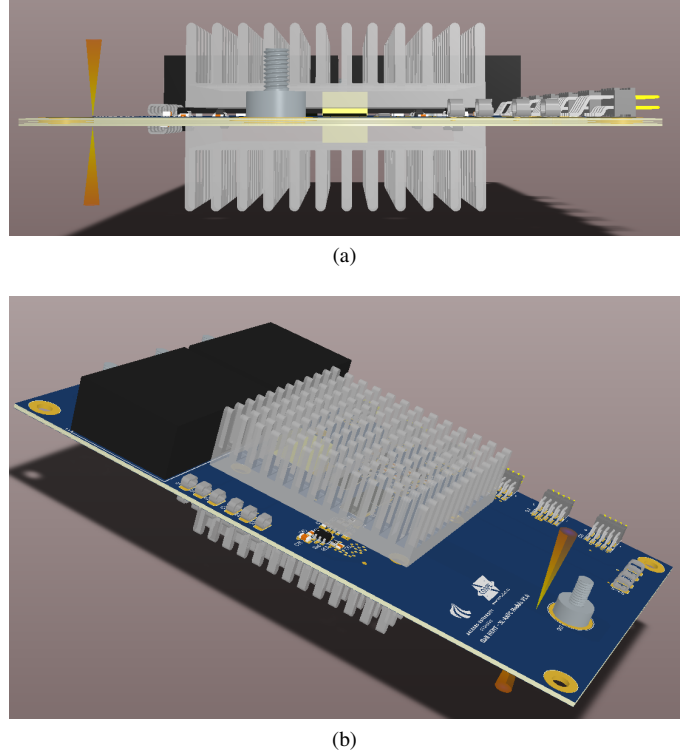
Double-sided heat sink mounting for the proposed PCB layout: (a) side view and (b) overall view.
